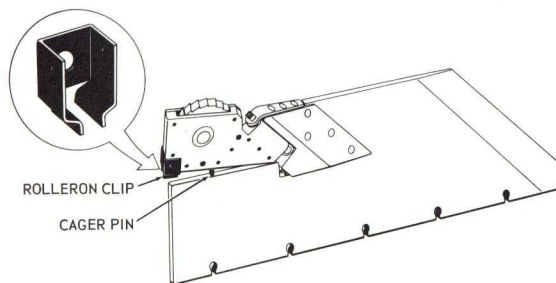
Caging Clip in Place on Canted-Hinge Rolleron.
